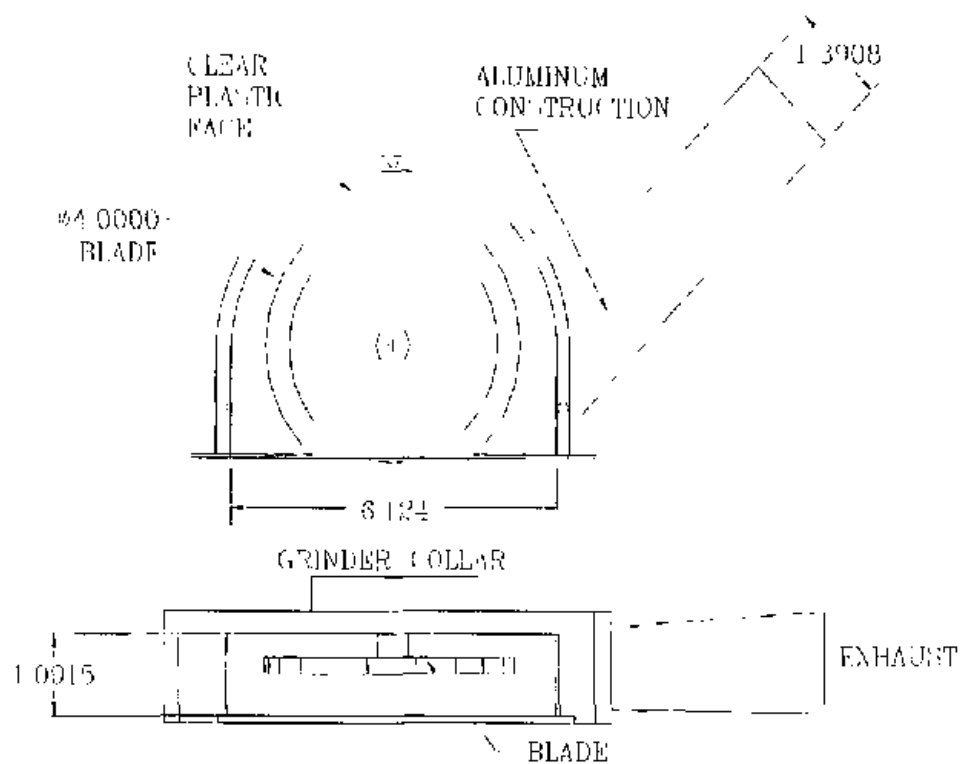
Schematic description of the Joe Due Shroud, dimensions are in inches
